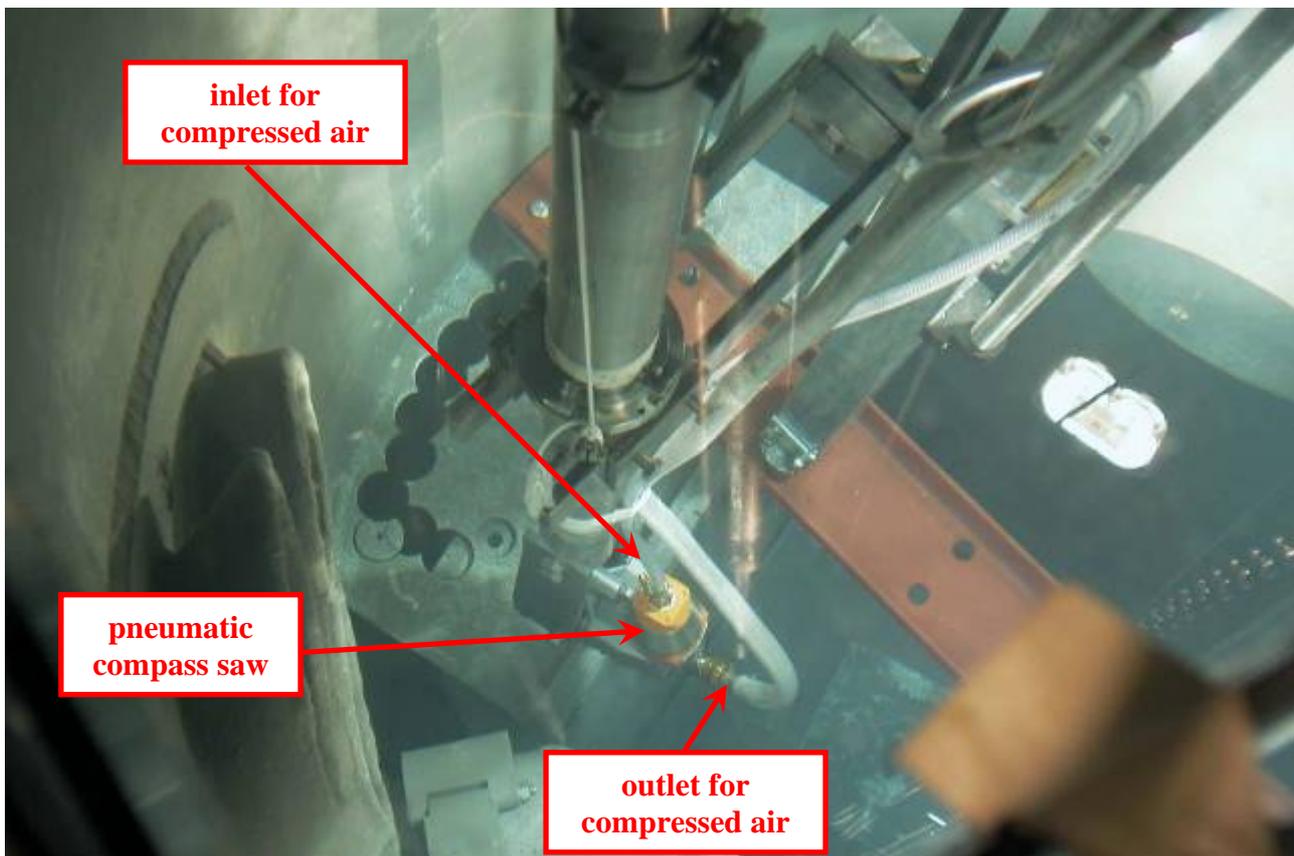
Removal of equipment installed in reactor tank – sawing underwater
